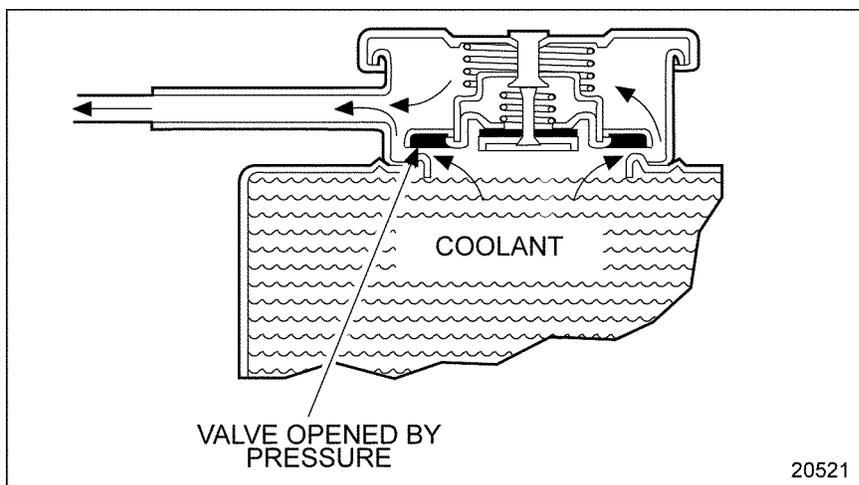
Pressure Control Cap — Pressure Valve Open
